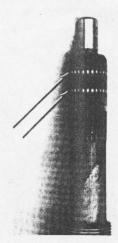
Illustrated transmission identifying the circumferential grooves on input shaft.
